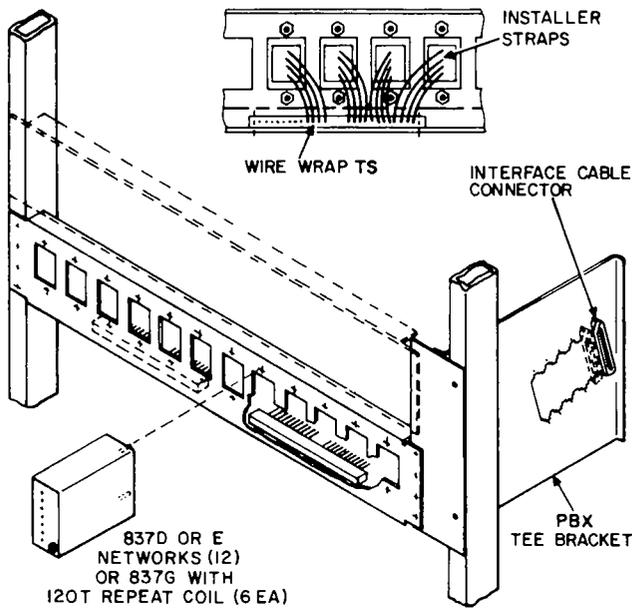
Shelf Assembly for 837-Type Networks [J99380B(MD)]
